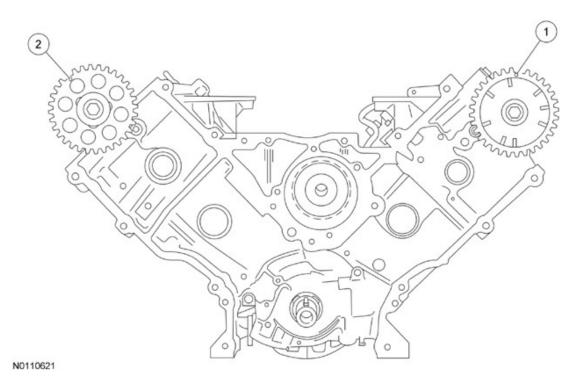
Identifying LH Camshaft Timing Mark And RH Camshaft Timing Mark Courtesy of FORD MOTOR CO.
